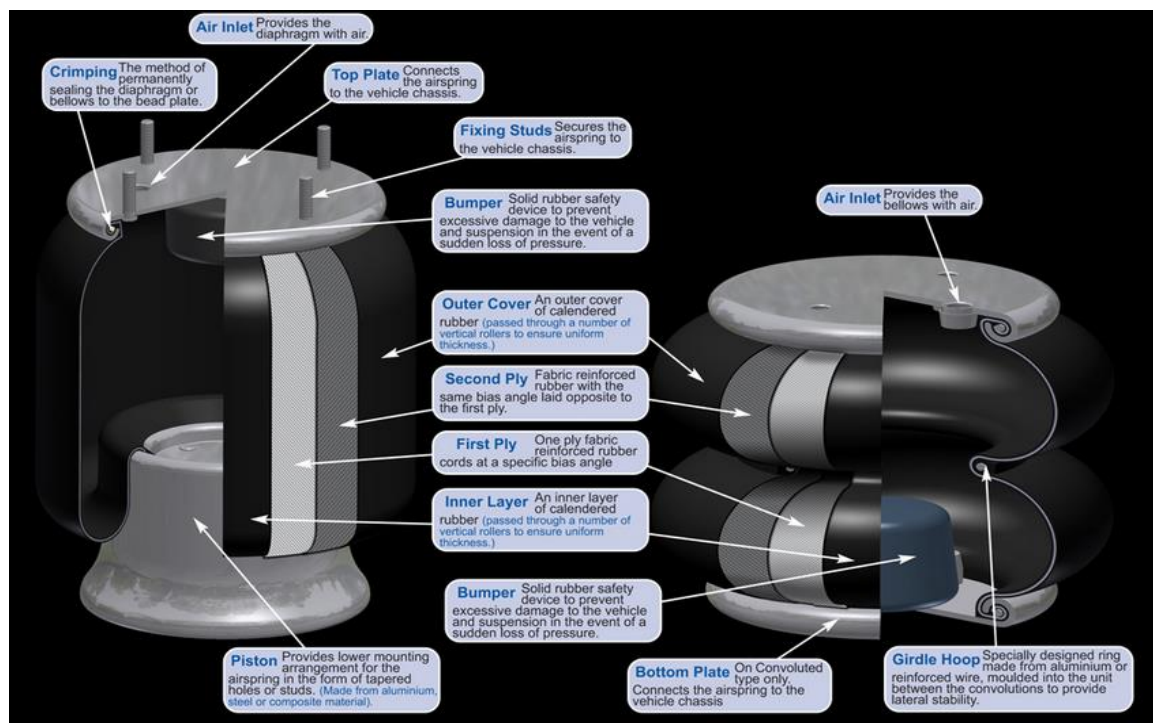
Parts of the rolling lobe air spring in the left and convoluted air spring in the right [26].
